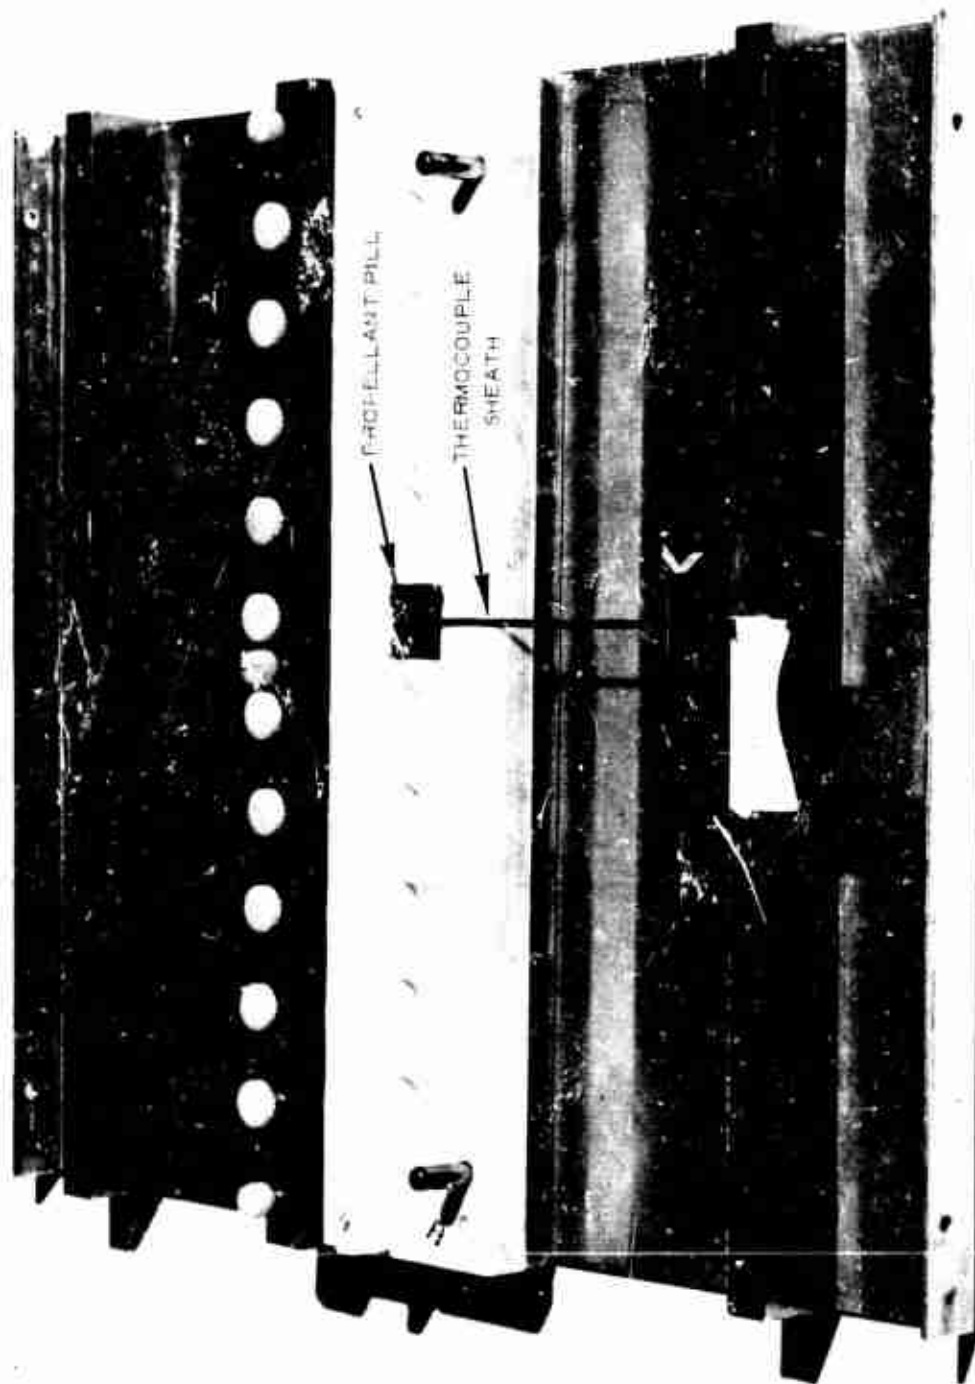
Propellant Pill Mold with a Propellant Pill Containing a Thermocouple
